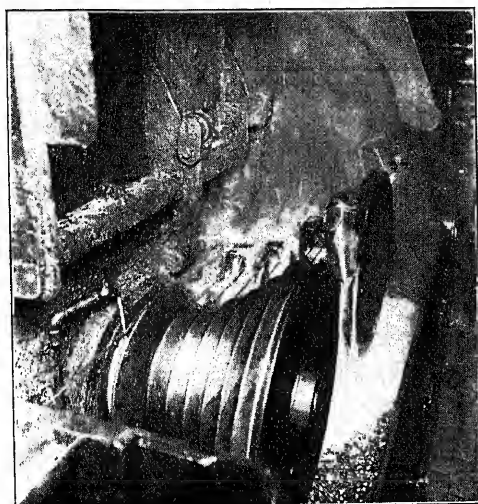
CLOSE-UP VIEW OF NO. 1 MACHINE
